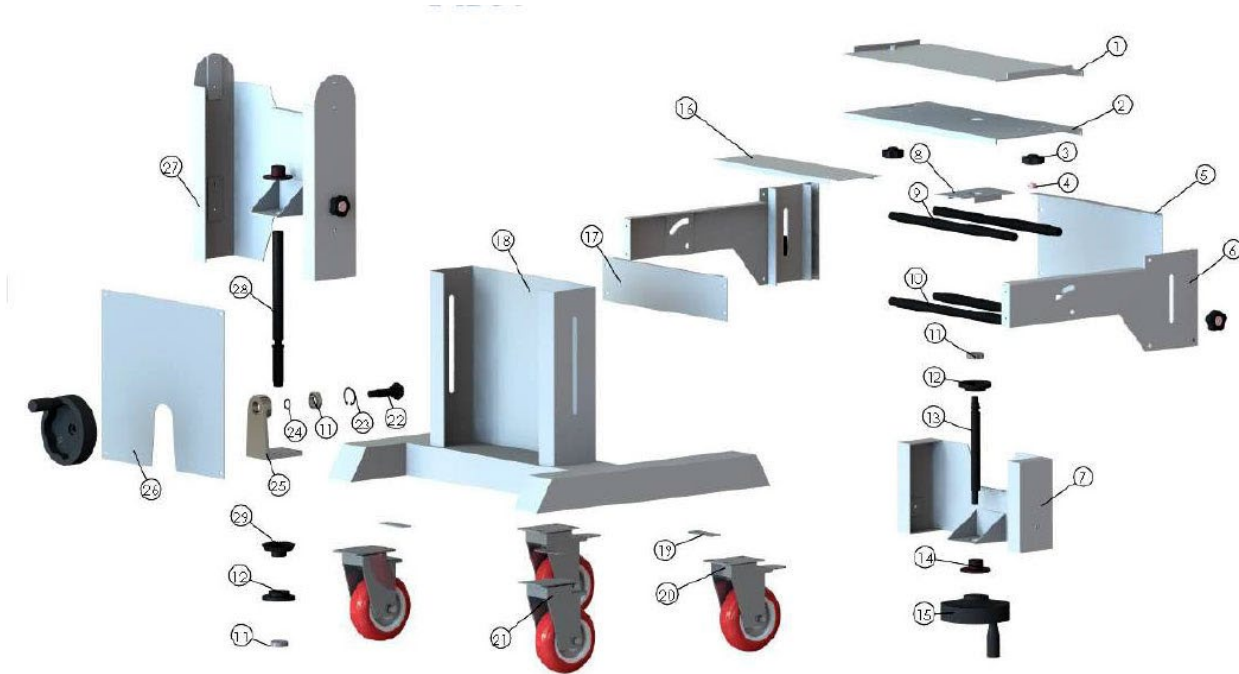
FRS-1120W Sealer Rack Parts Diagram
